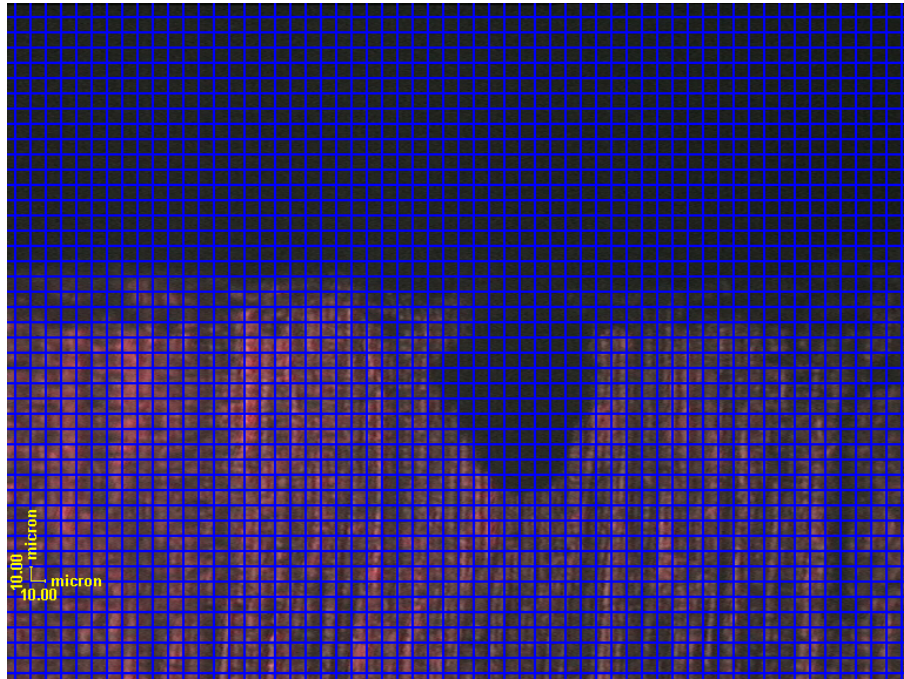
(b) Flank wear at diameter 10mm, spindle speed 19.78m/min and feed rate 0.18mm/rev
